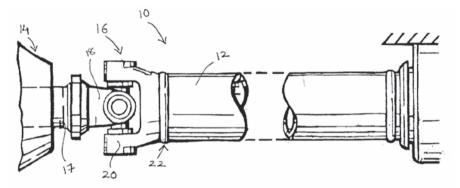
A side view of the driveline assembly in accordance with the teachings of the present invention [11]
